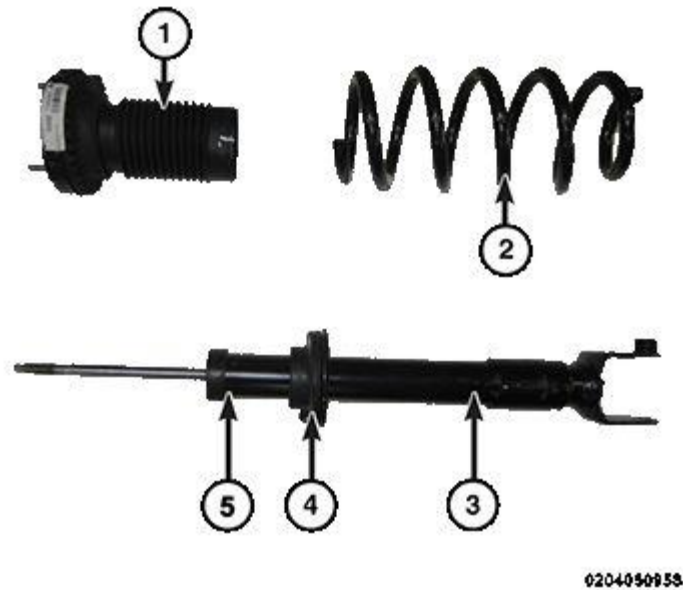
Coil Spring Isolators, Coil Spring & Shock
